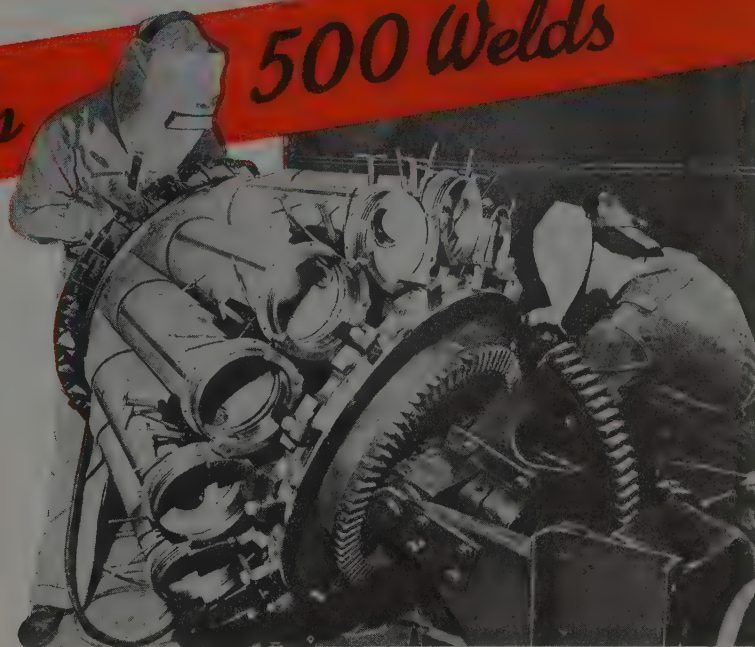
Circumferential seam welding of large flange to cone assembly
